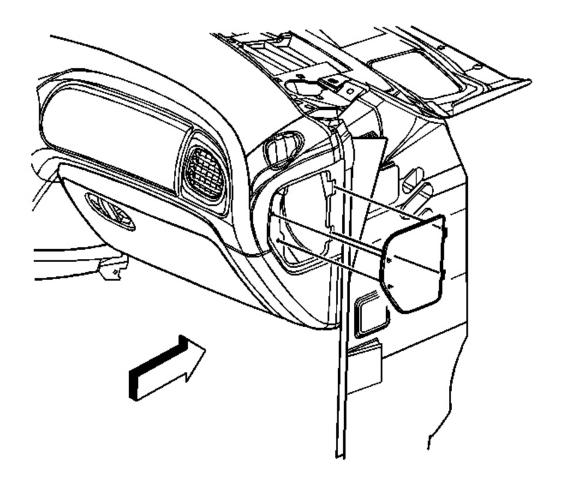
Identifying Right I/P Access Cover Courtesy of GENERAL MOTORS CORP.
